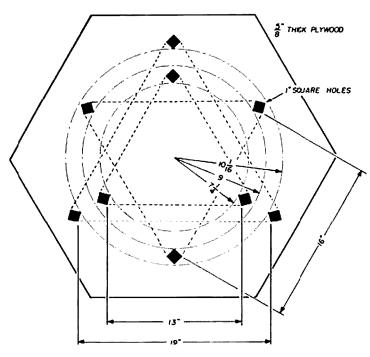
Geometry of templates used for positioning tower elements during welding. Jigs are made from a single sheet of 4 x 8, 5/8-inch plywood.
